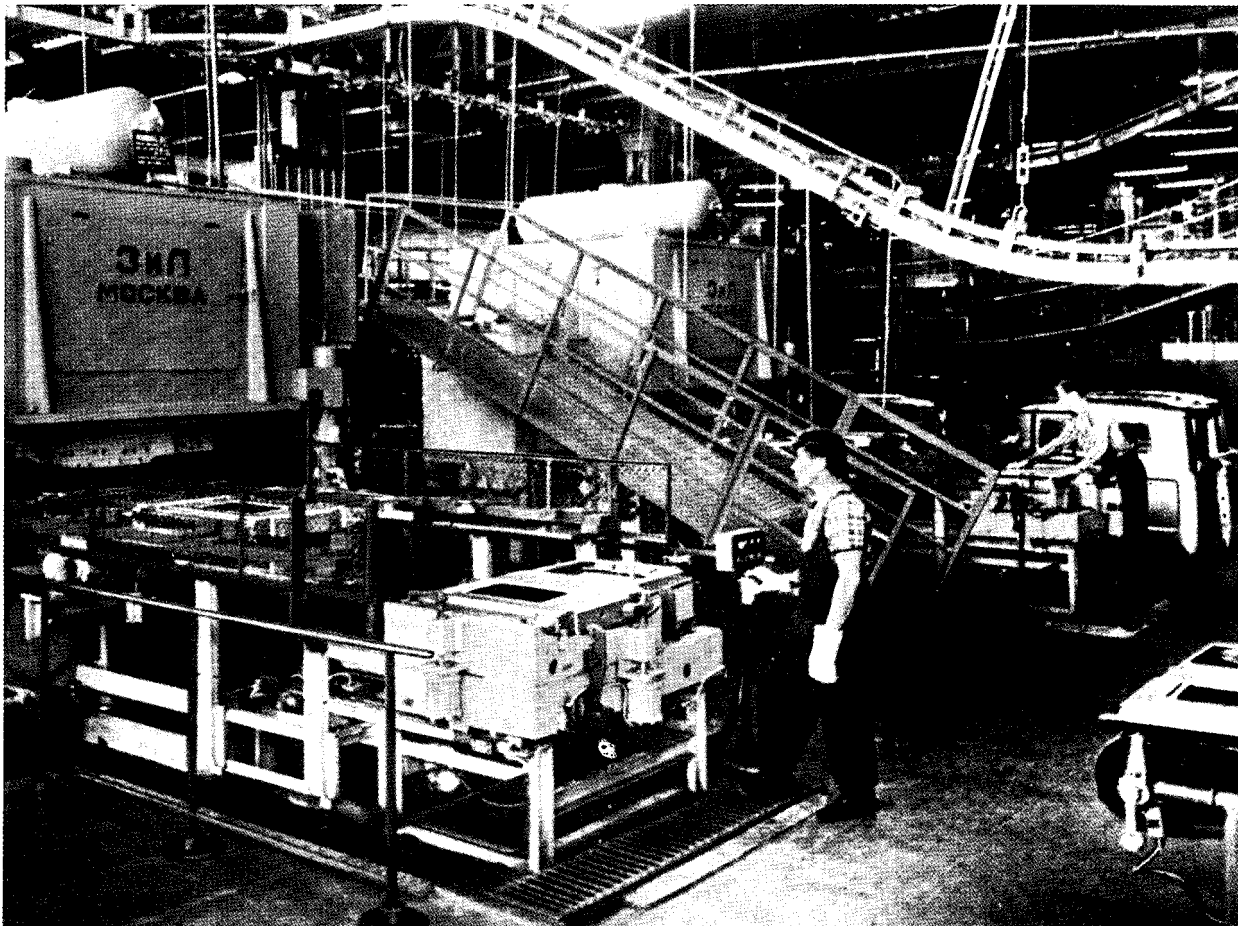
Western-supplied automated welding and cabin assembly line at ZIL plant. [REDACTED]
